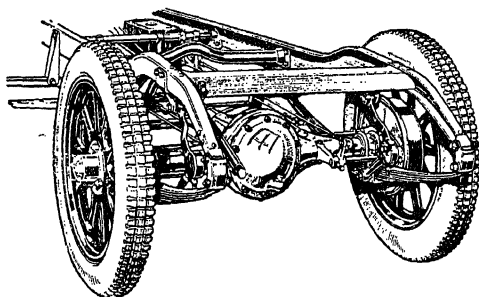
Rear View of Earlier Small Car Chassis, showing Frame and Semi-Elliptic Springs.
